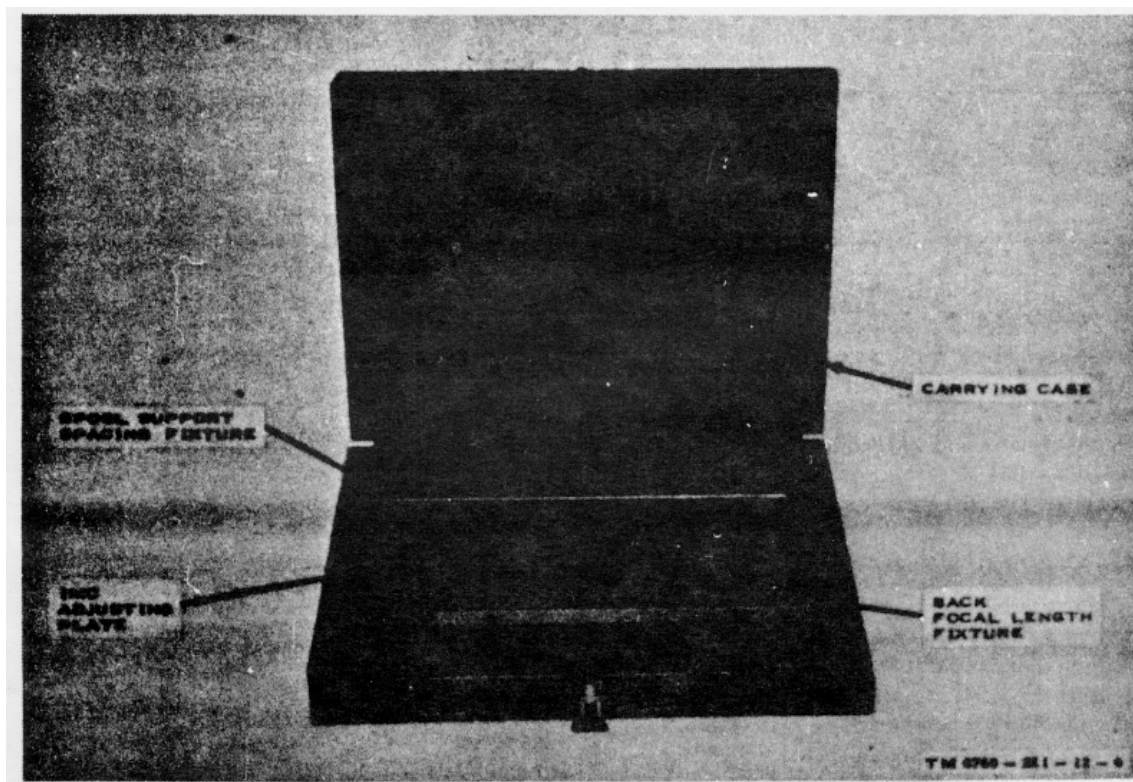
Tool Kit, Camera Alignment and Adjustment LS-49A.
